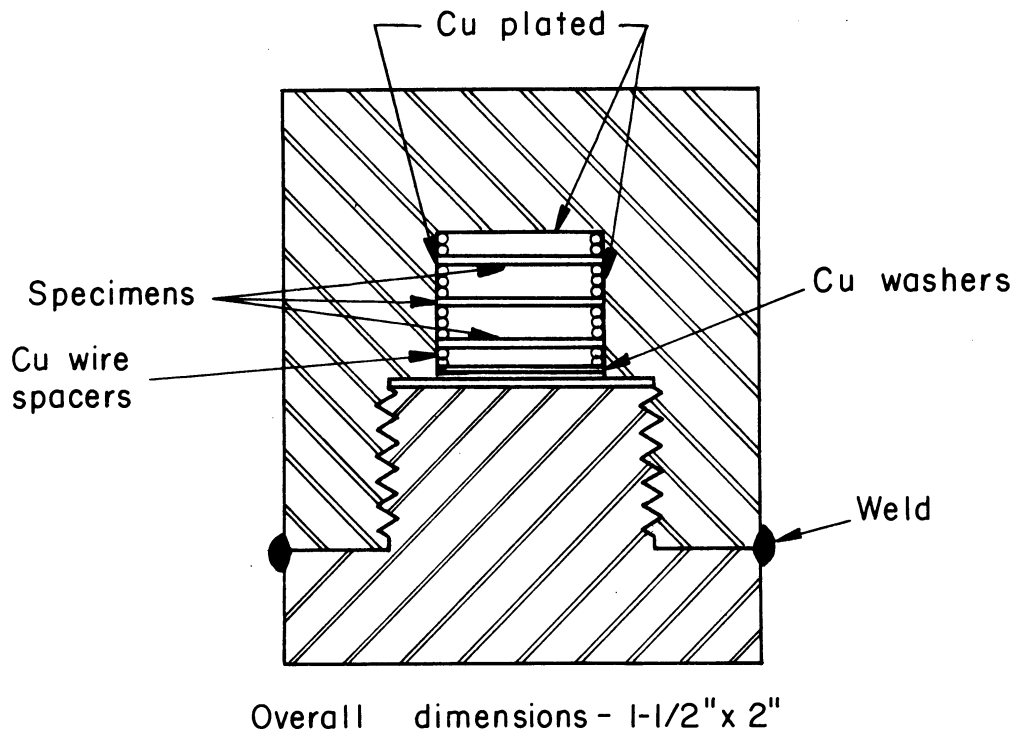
Cross-Section of Steel Carburizing Capsule in Loaded Condition.
